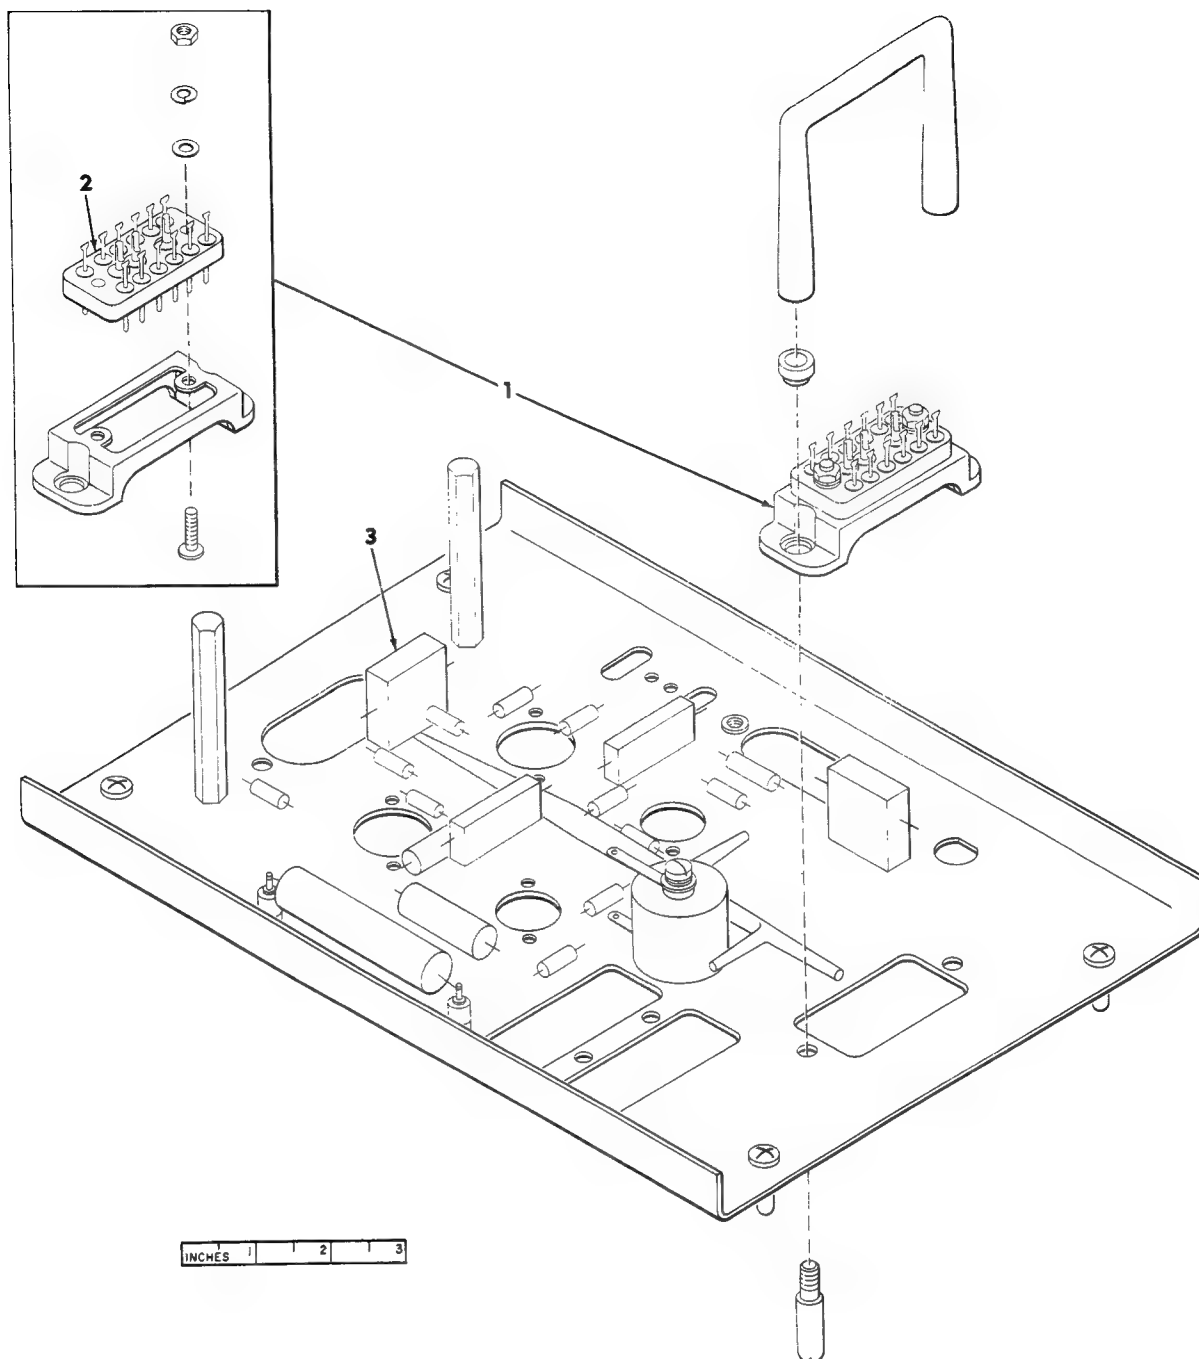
Simulator, radar signal SM-76/M (8009261)—partial exploded view
